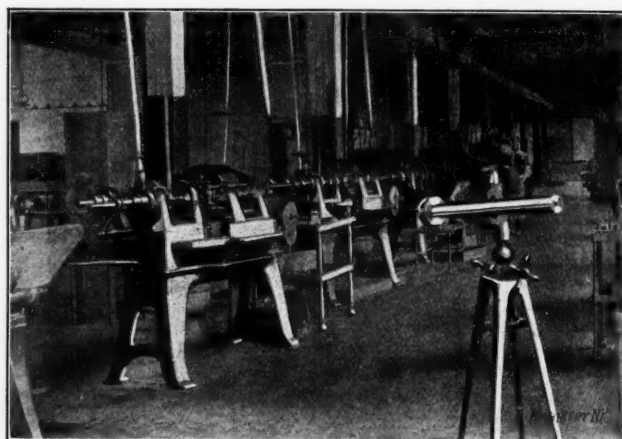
Battery of Automatic Screw Machines which make the Tool-holder Set-screws
